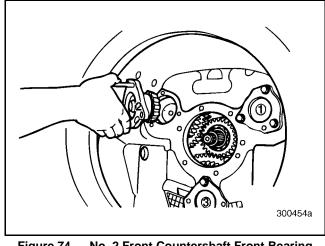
No. 2 Front Countershaft Front Bearing Cover Removed
